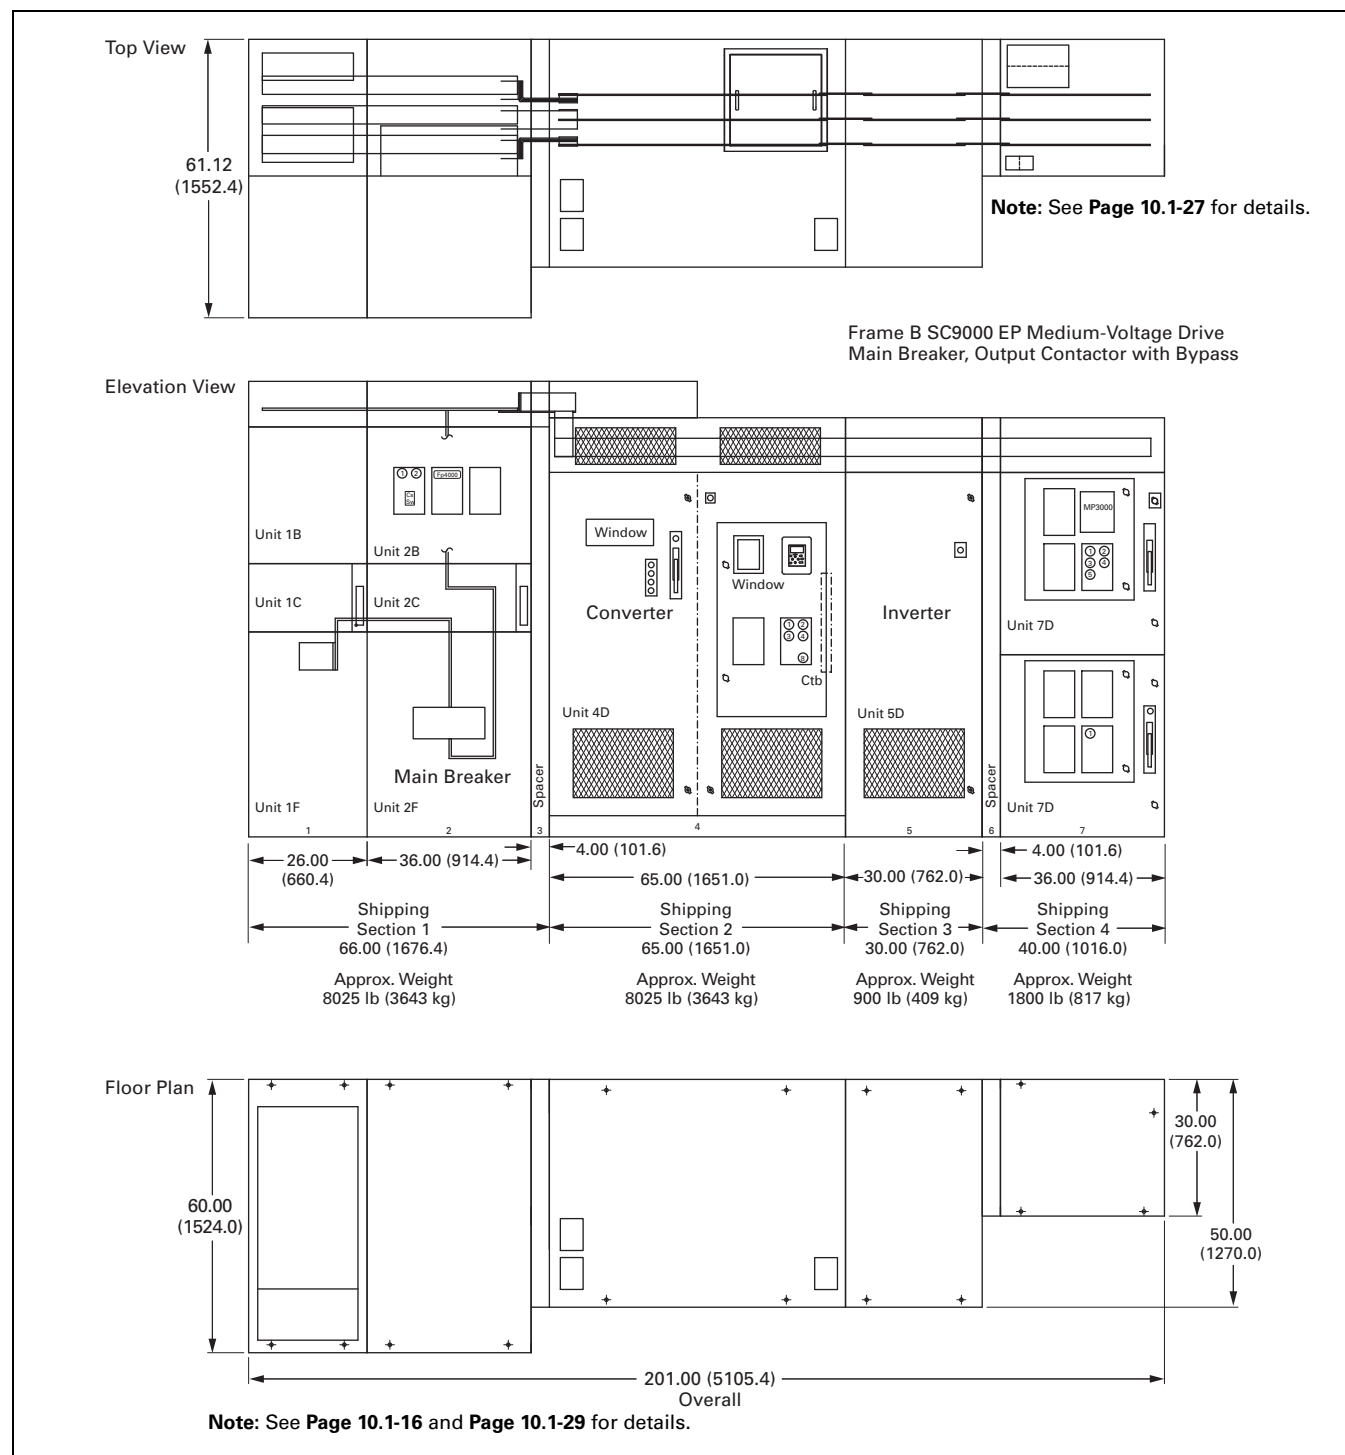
Eaton Medium-Voltage Integrated Control Gear with Main Breaker Dimensions—(See Page 10.1-6 for Information on Main Bus. Refer to Eaton for Larger hp Layouts and Detailed Assembly Dimensions.)
